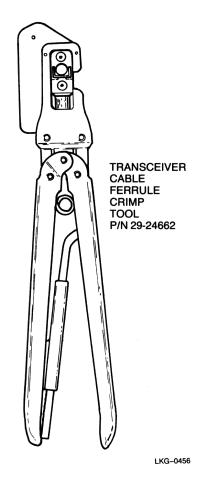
Transceiver Cable Ferrule Crimp Tool and Die Set
